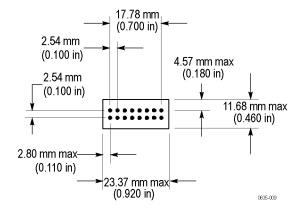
Dimensions of 8-channel probe footprint with probe grouper attached
